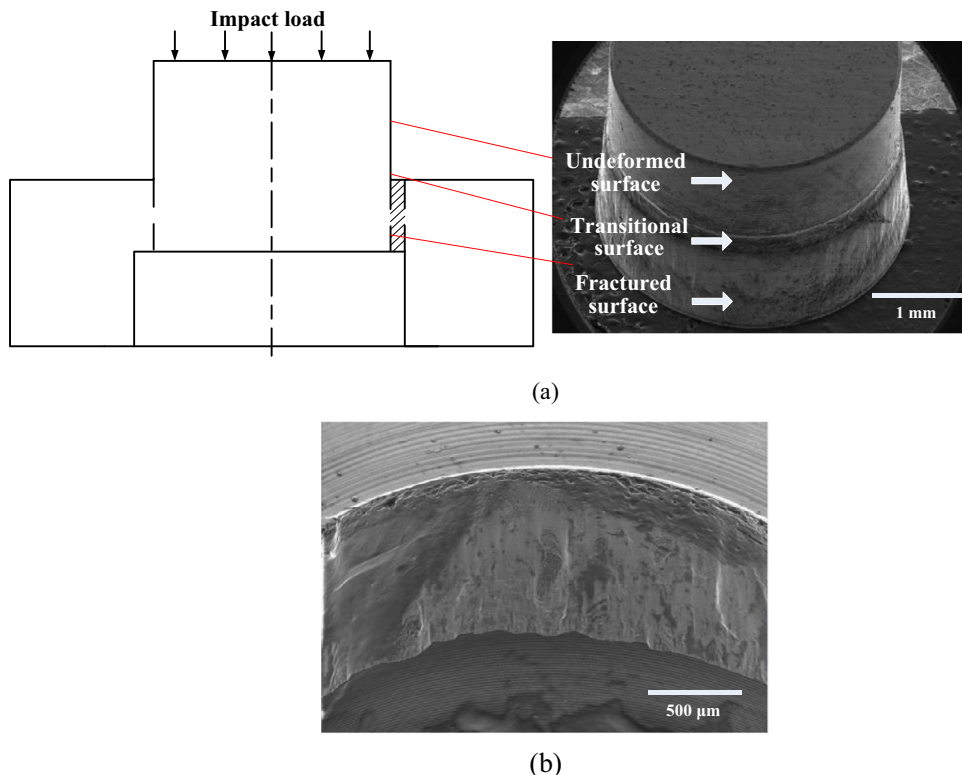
SEM photographs of the hat-shaped specimen after the SHPB shear test: (a) cylinder part and (b) inner surface of the annulus part.
